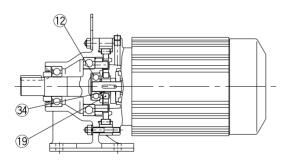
Type CHHM (Horizontal • Gearmotor), Single Reduction (Example : Frame size 6225)
